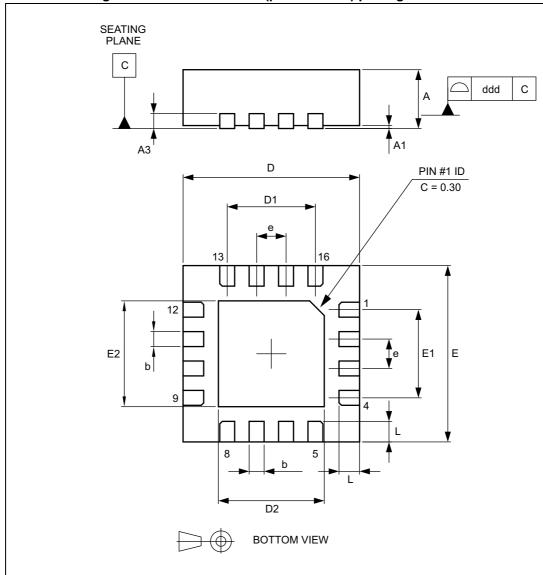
QFN16 3 x 3 mm (pitch 0.5 mm) package outline
